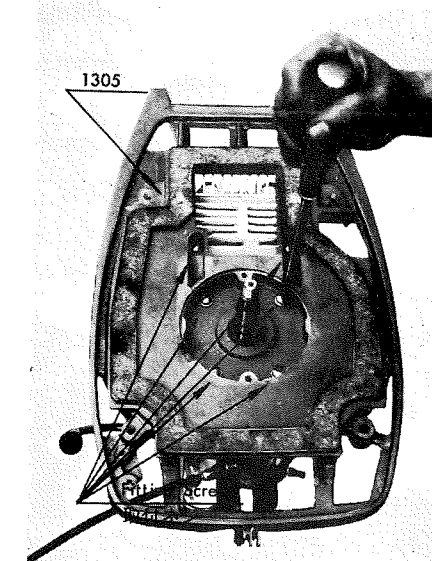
Unfixing fuel tank stand 1305...Fuel tank stand
